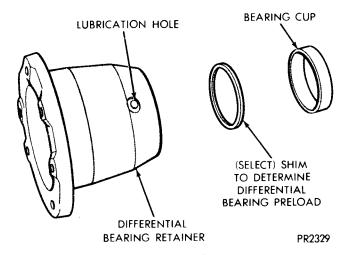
Disassembled View of Differential Bearing Retainer (Select) Shim, and Bearing Cup
